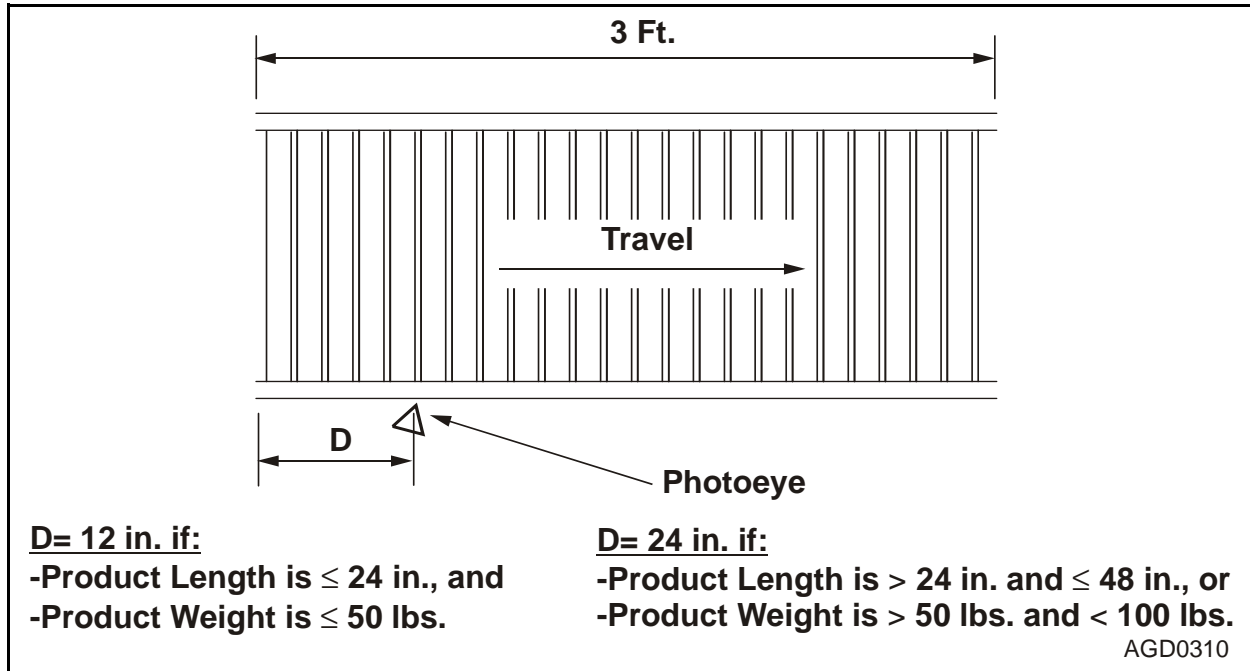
8 Photo-Eye Placement for Sequential Zone Control
